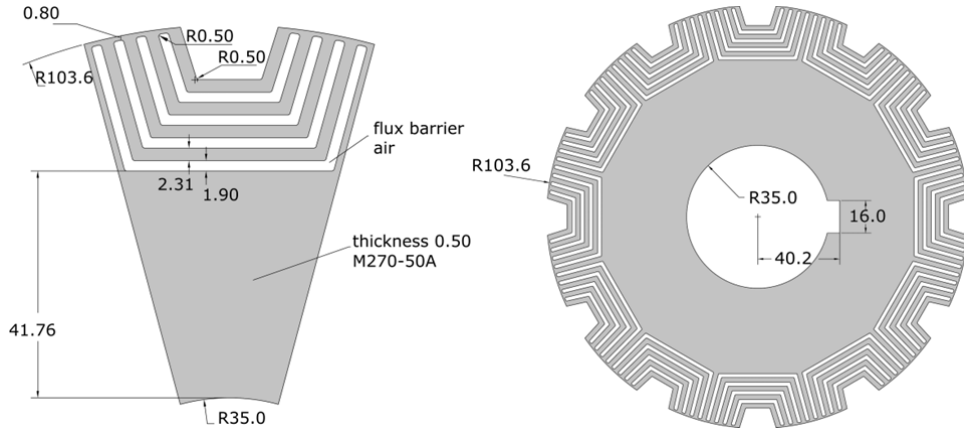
BLDC-MRM flux barrier rotor main dimensions (in mm)
